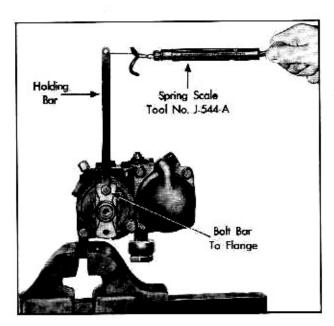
Measuring Pull Through Center complete steering jacket assembly up or down as required. Redrill lower clamp and jacket if necessary to reinstall screw.
